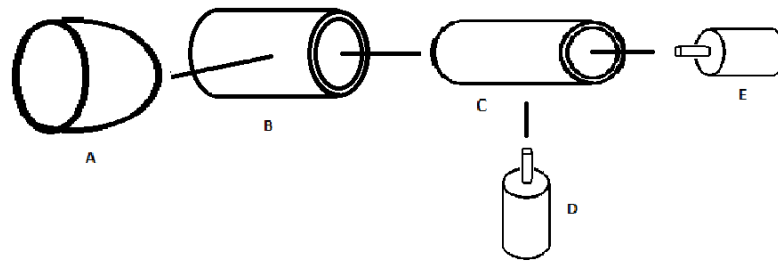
Mechanical Interfacing between Motor and Lighting Units
